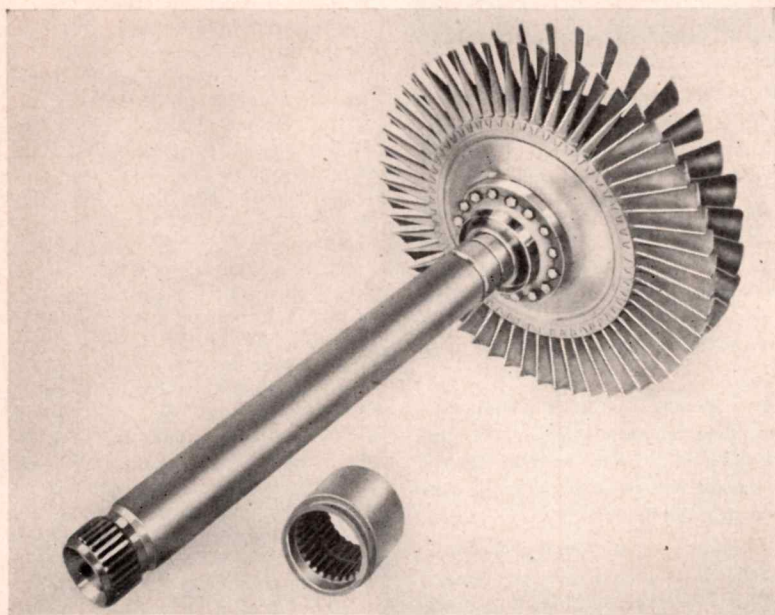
Two-stage turbine supplies mechanical power for driving compressor rotor and engine-driven accessories
